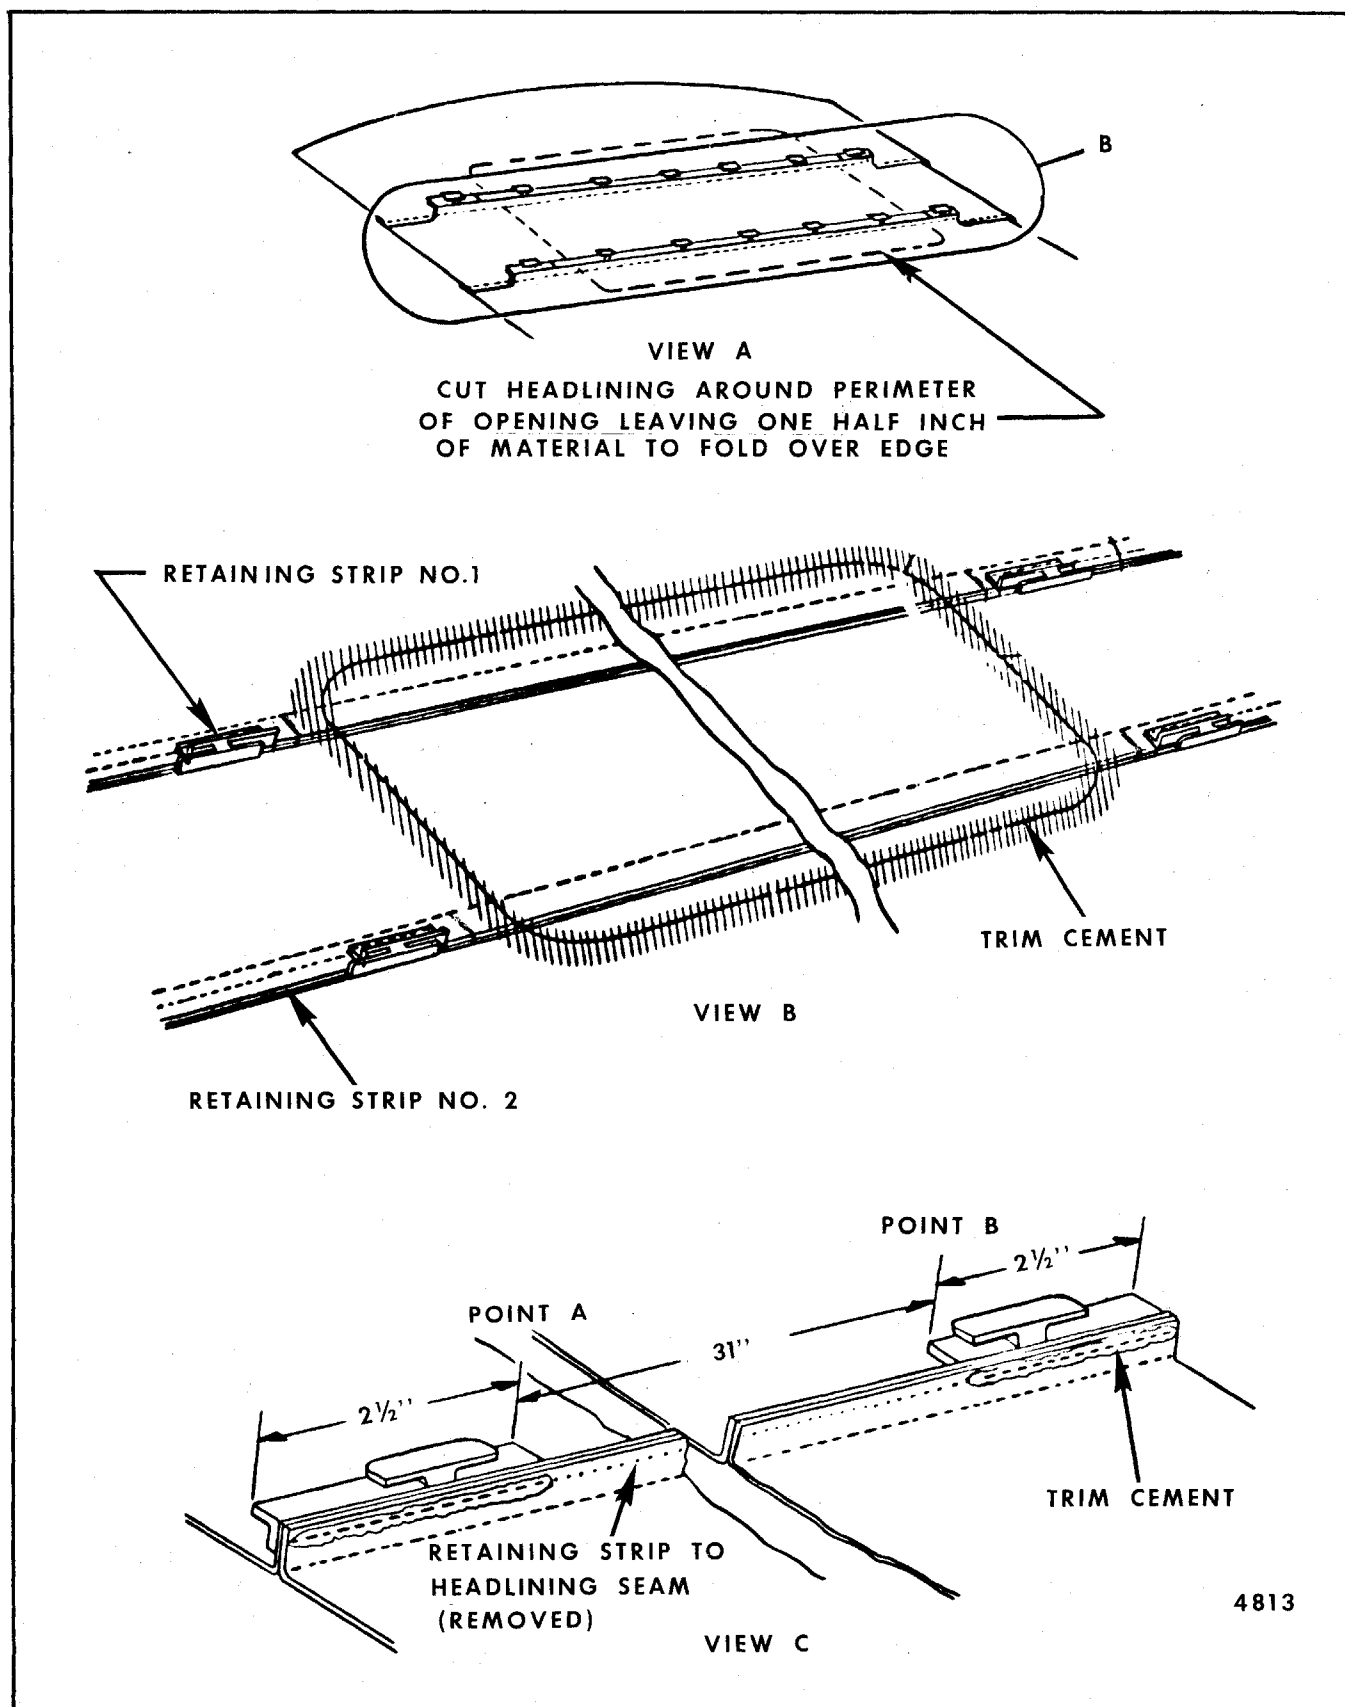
Headlining Installation - Styles with Vista Vent
